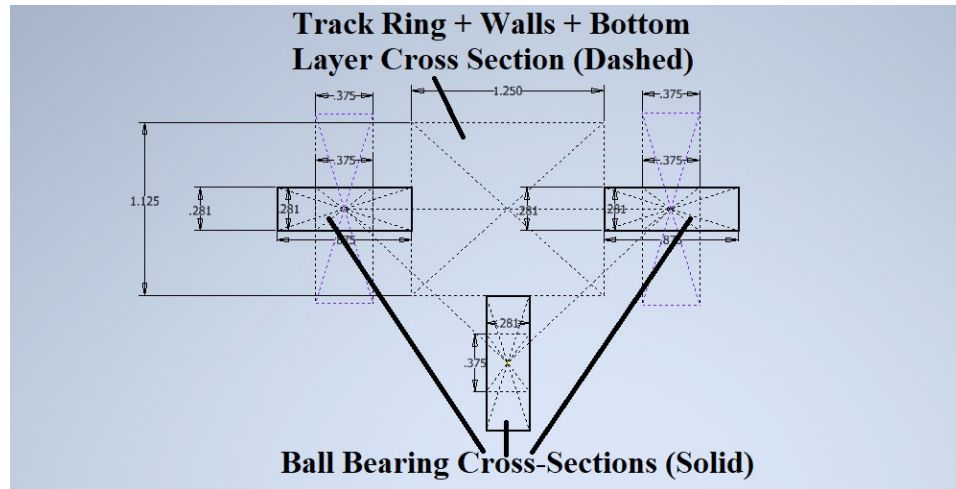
Annotated Track Ring Bearing Block Geometry Sketch
